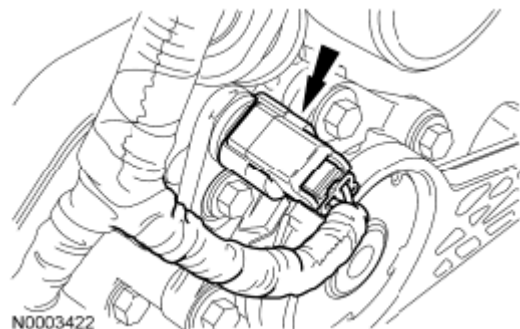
Locating RH Camshaft Position Sensor Electrical Connector
